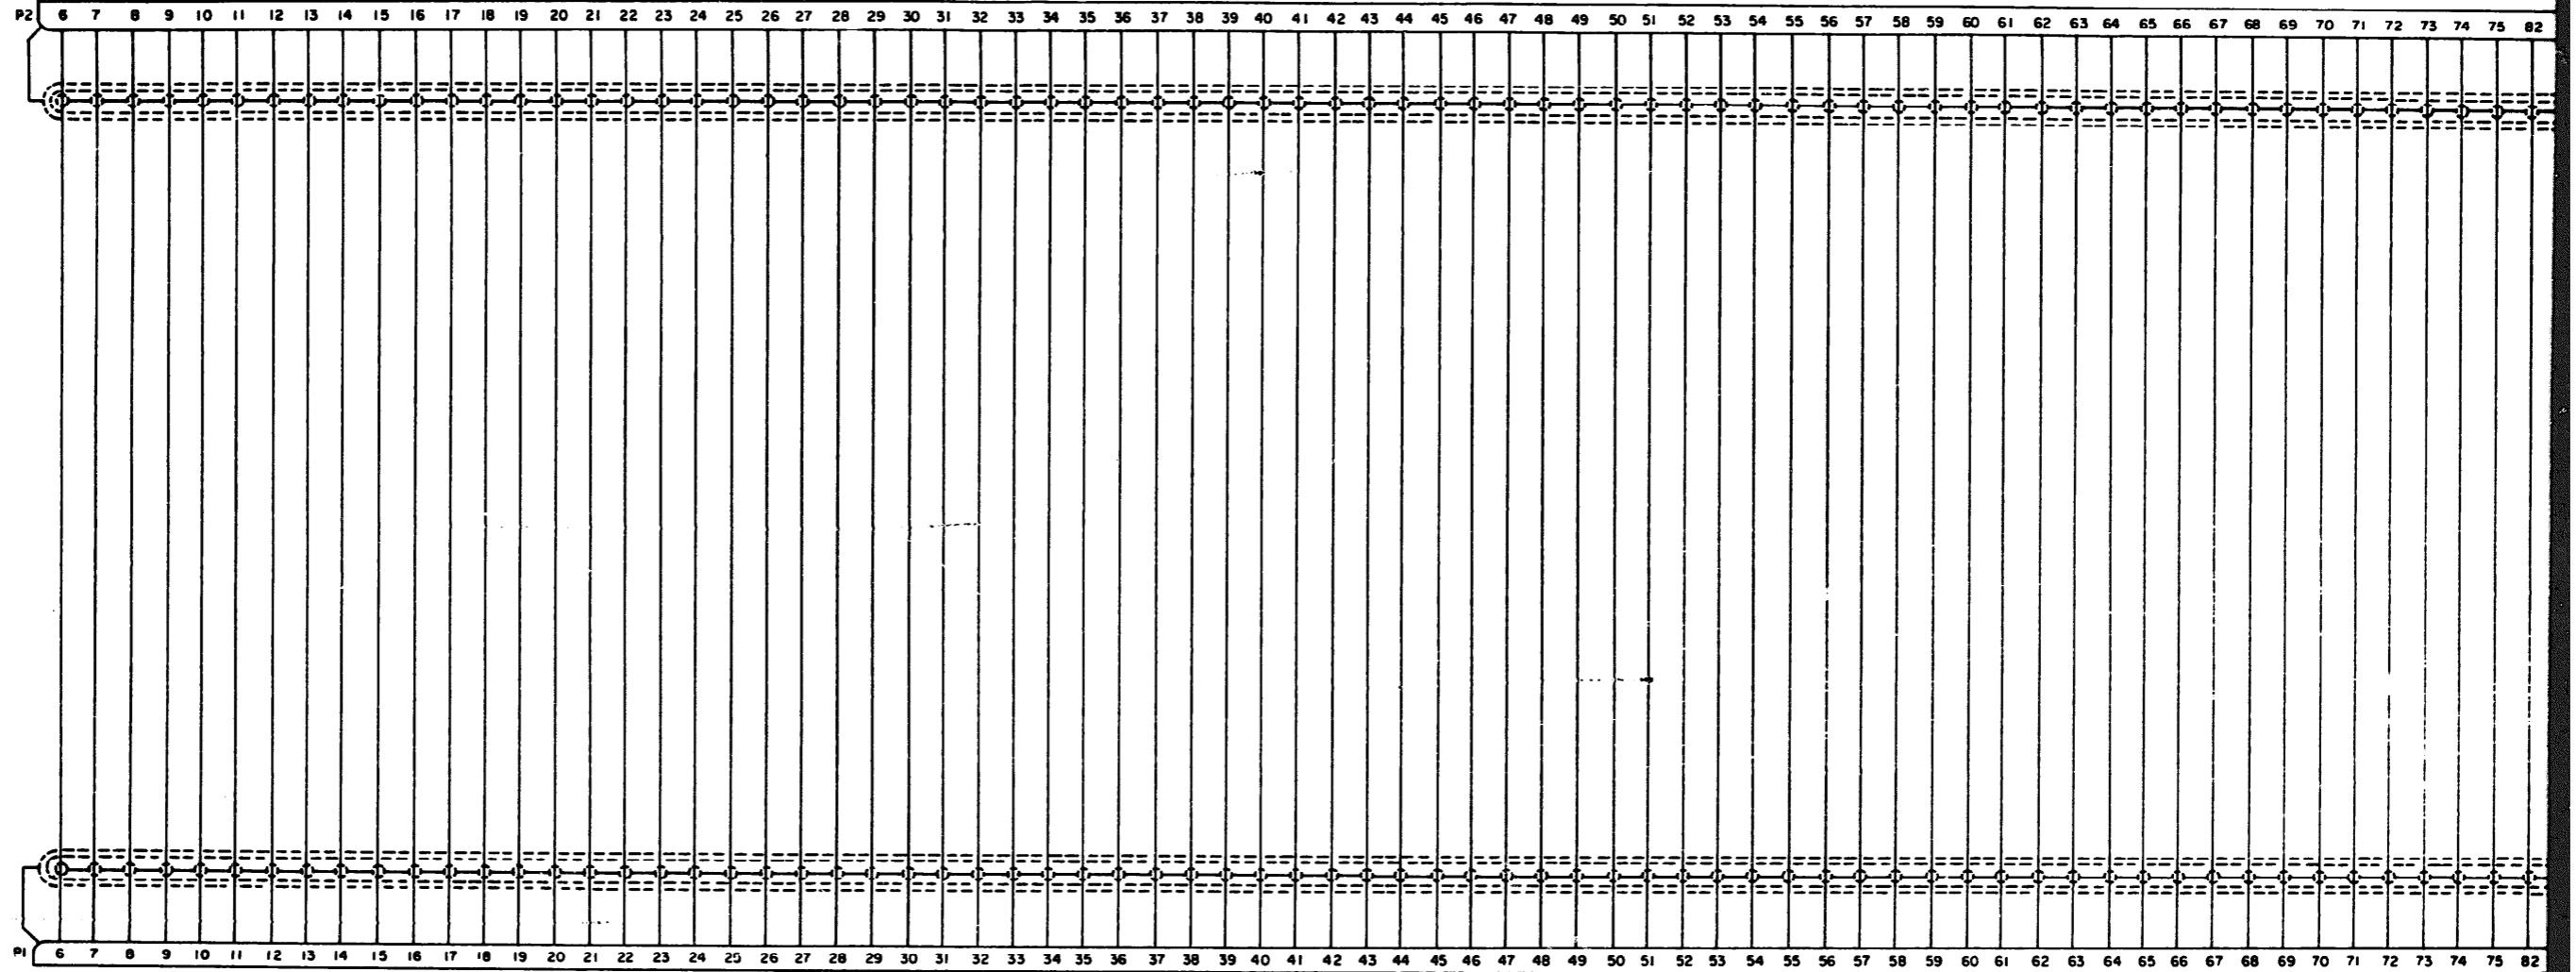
Cable Assembly, Special Purpose, Electrical, Branched
